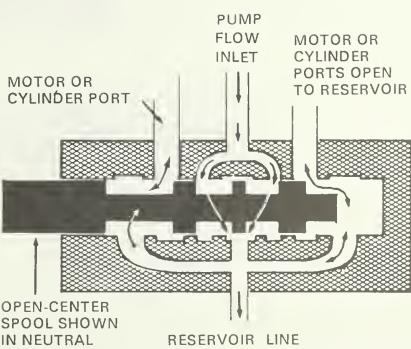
Open-center spool valve. Unlike the tandem-center valve, the cylinder ports are open when the spool is in neutral. When activated, the flow is the same as for tandem-center valves.
